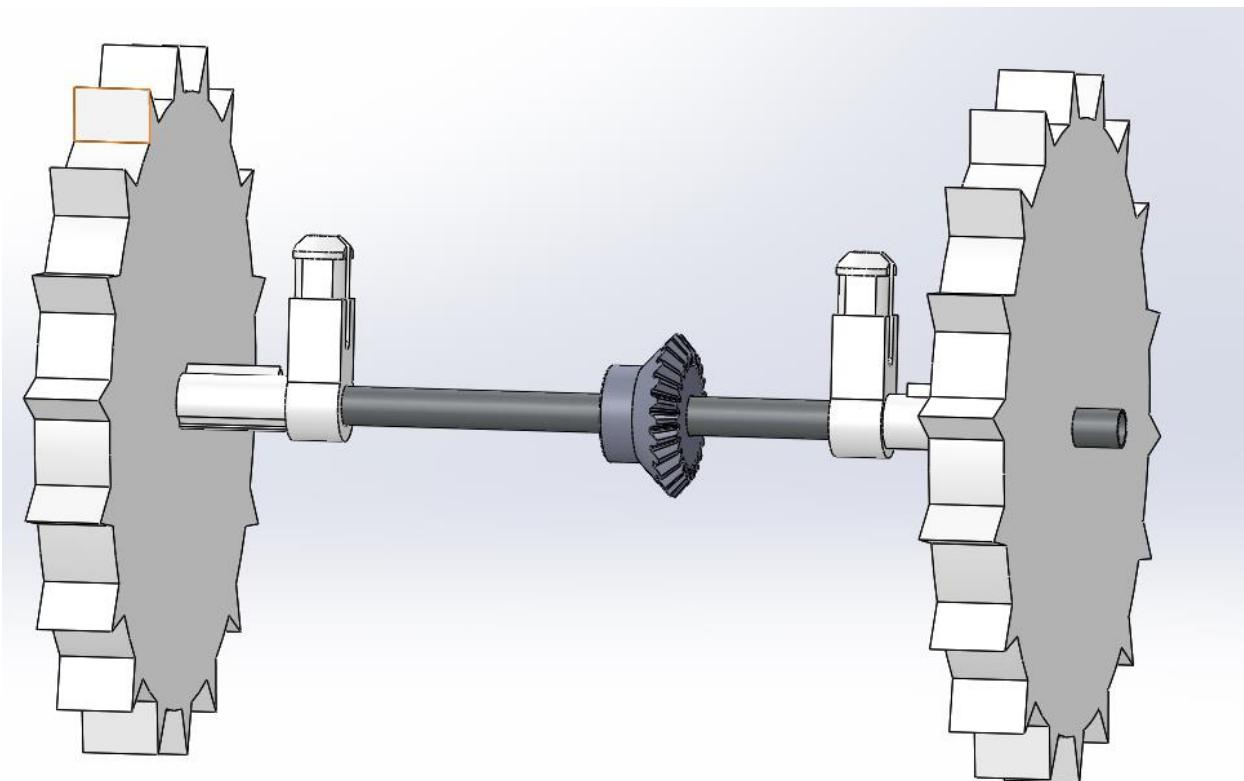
Displays the rear wheel assembly including an extruded aluminum shaft, snap connections to the base, a bevel gear, and the rear wheel.
